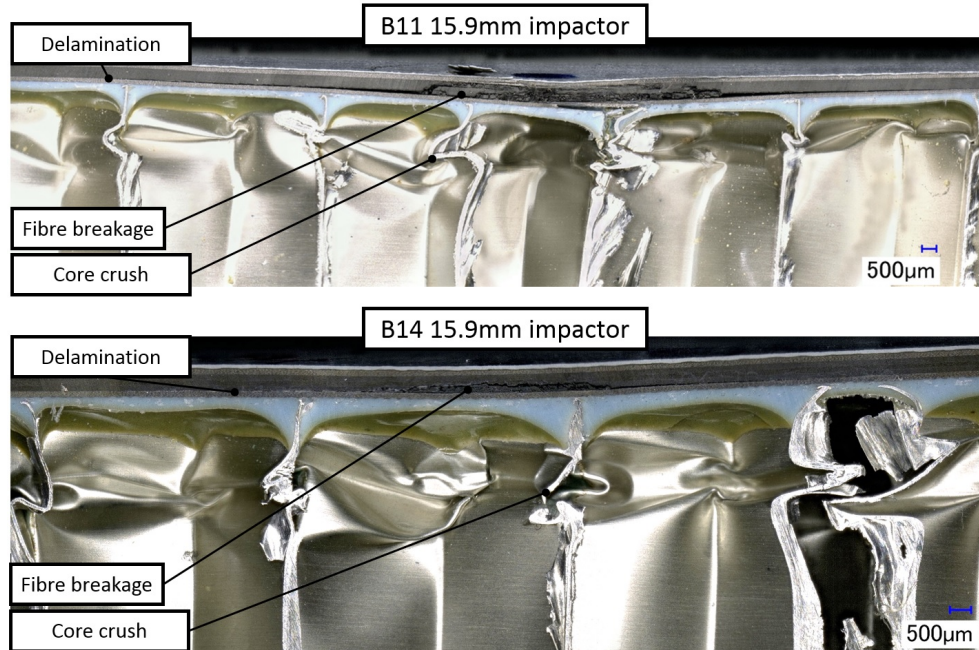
B11 and B14 15.9 mm impact cross section with laminate damage and core crush.
